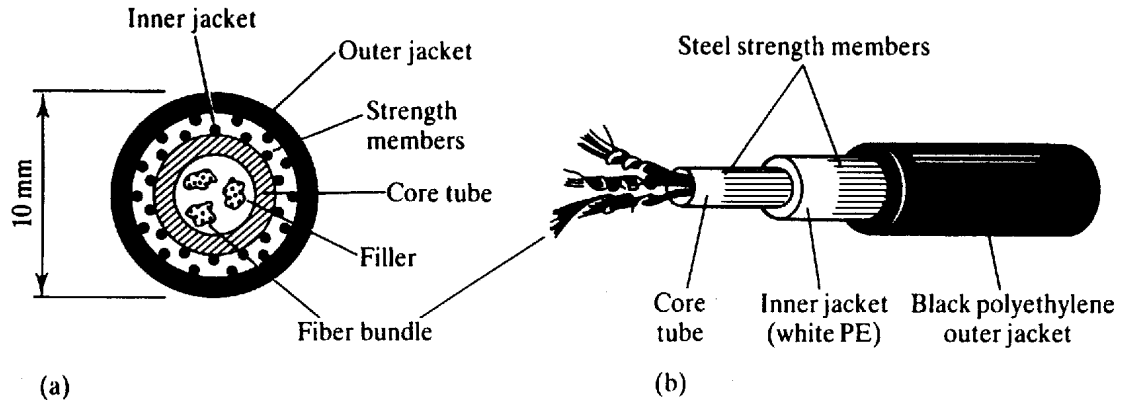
A loose fiber bundle cable design: (a) section; (b) perspective view.
